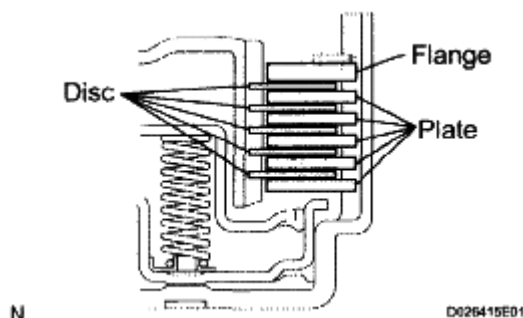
Identifying Plates, Discs And Flange Input Shaft
